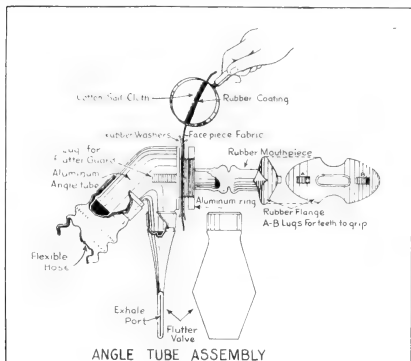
TUBE ASSEMBLY SHOWING RUBBER MOUTH-PIECE, FLUTTER VALVE AND FLEXIBLE HOSE.
